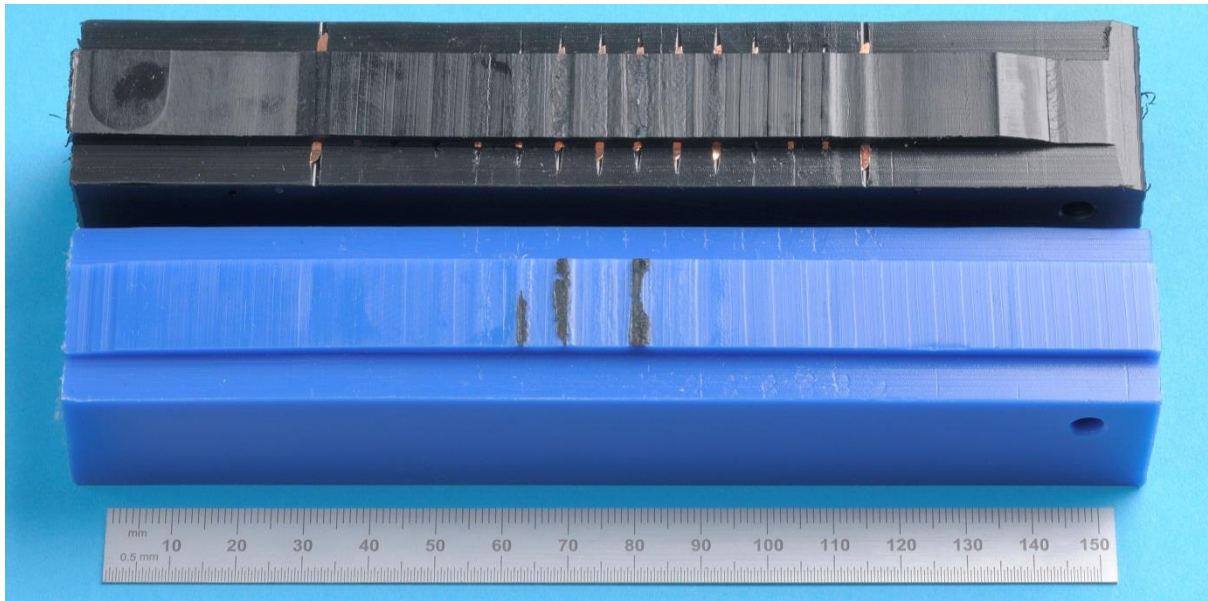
Brittle failure in a peel decohesion test specimen due to a cold weld in an EF joint.
